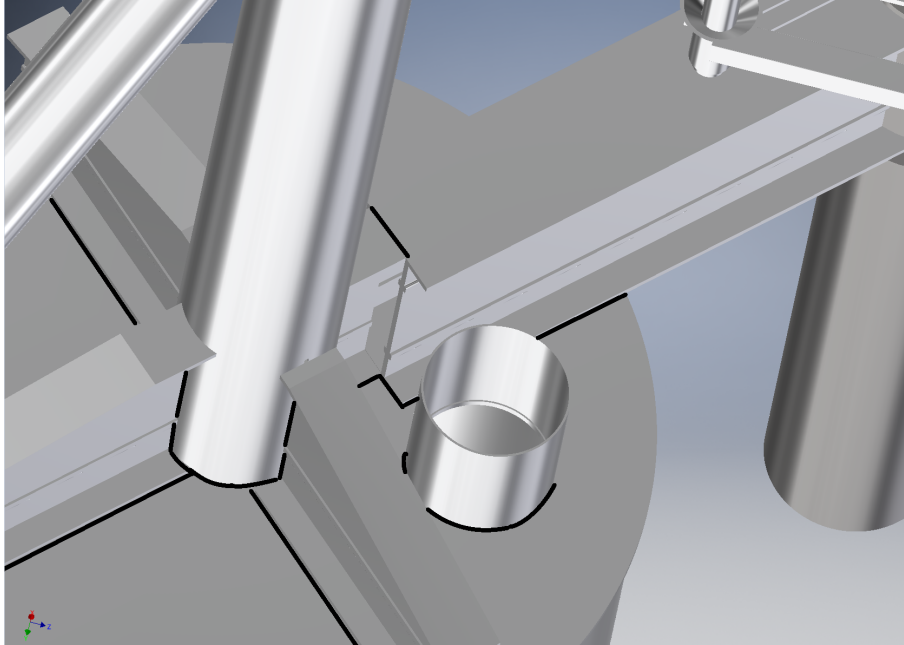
Weldments on suction anchor and beam 'i', dark lines are weldments.
